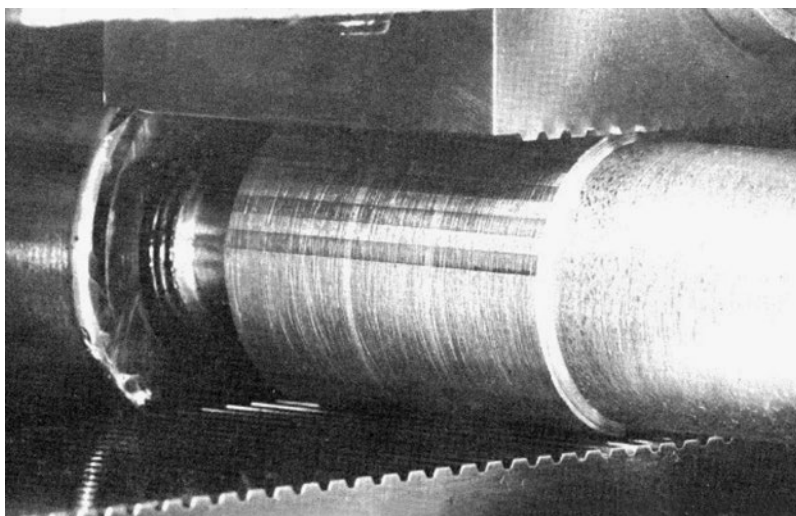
Start of a rolled gear. (Courtesy of Michigan Tool Company, Detroit, Michigan.)
